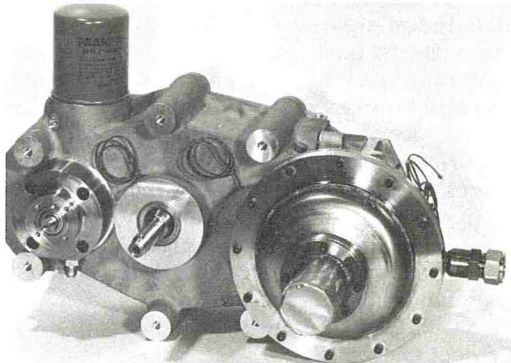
Crankcase assembly for reciprocating steam expander by Steam Power Systems, Inc.
